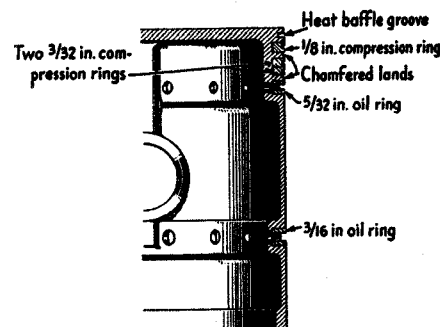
View showing piston construction and ring arrangement, beginning with engine unit 30-990 on 345-C and 355-C engines.
